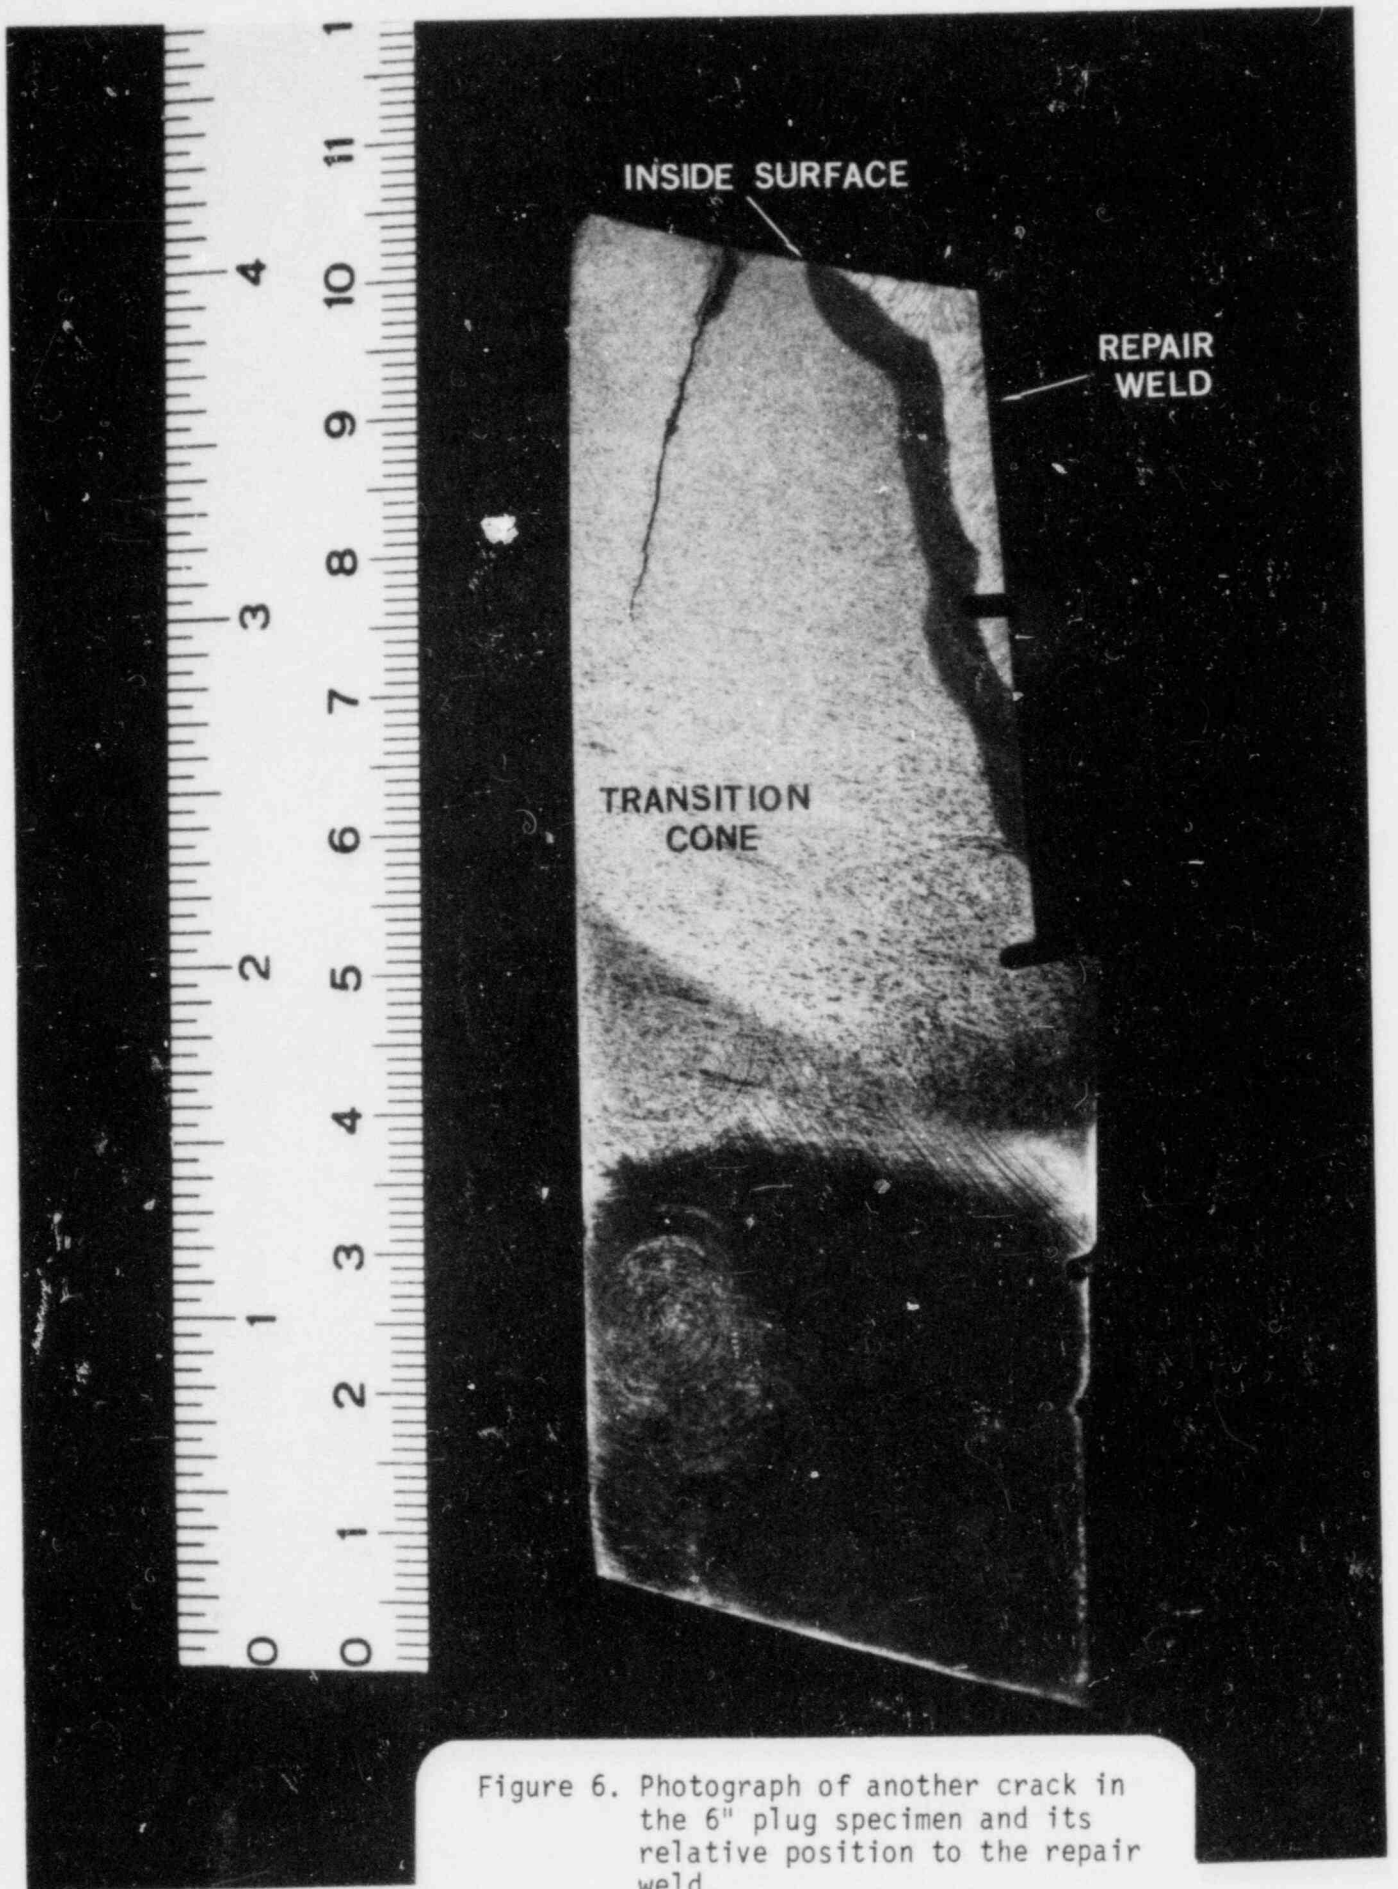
Photograph of another crack in the 6" plug specimen and its relative position to the repair weld.
